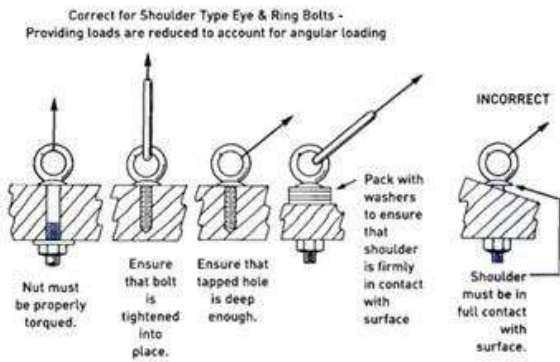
Use of Shoulder Type Eye and Ring Bolts
